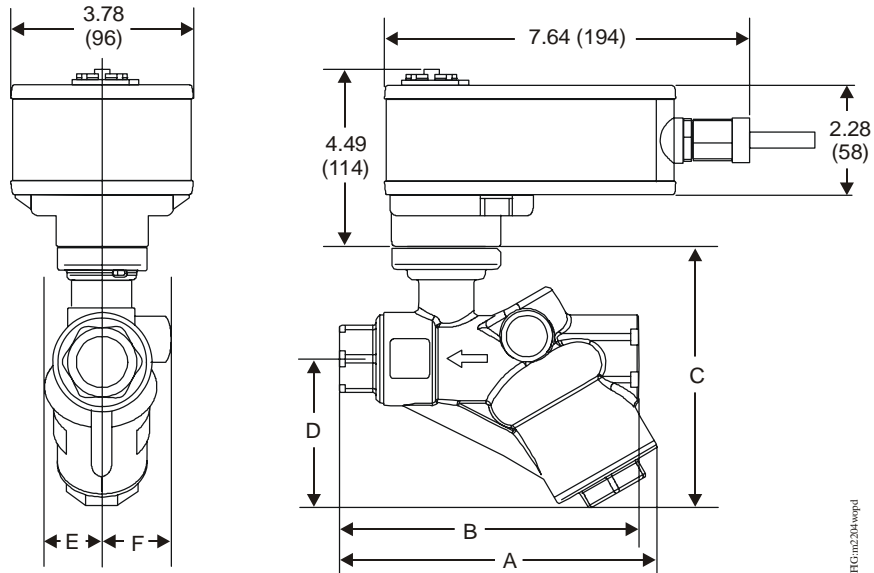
VA2104-HGA-2 Actuated P1000 Valve without Pressure Taps Dimensions, in. (mm)
